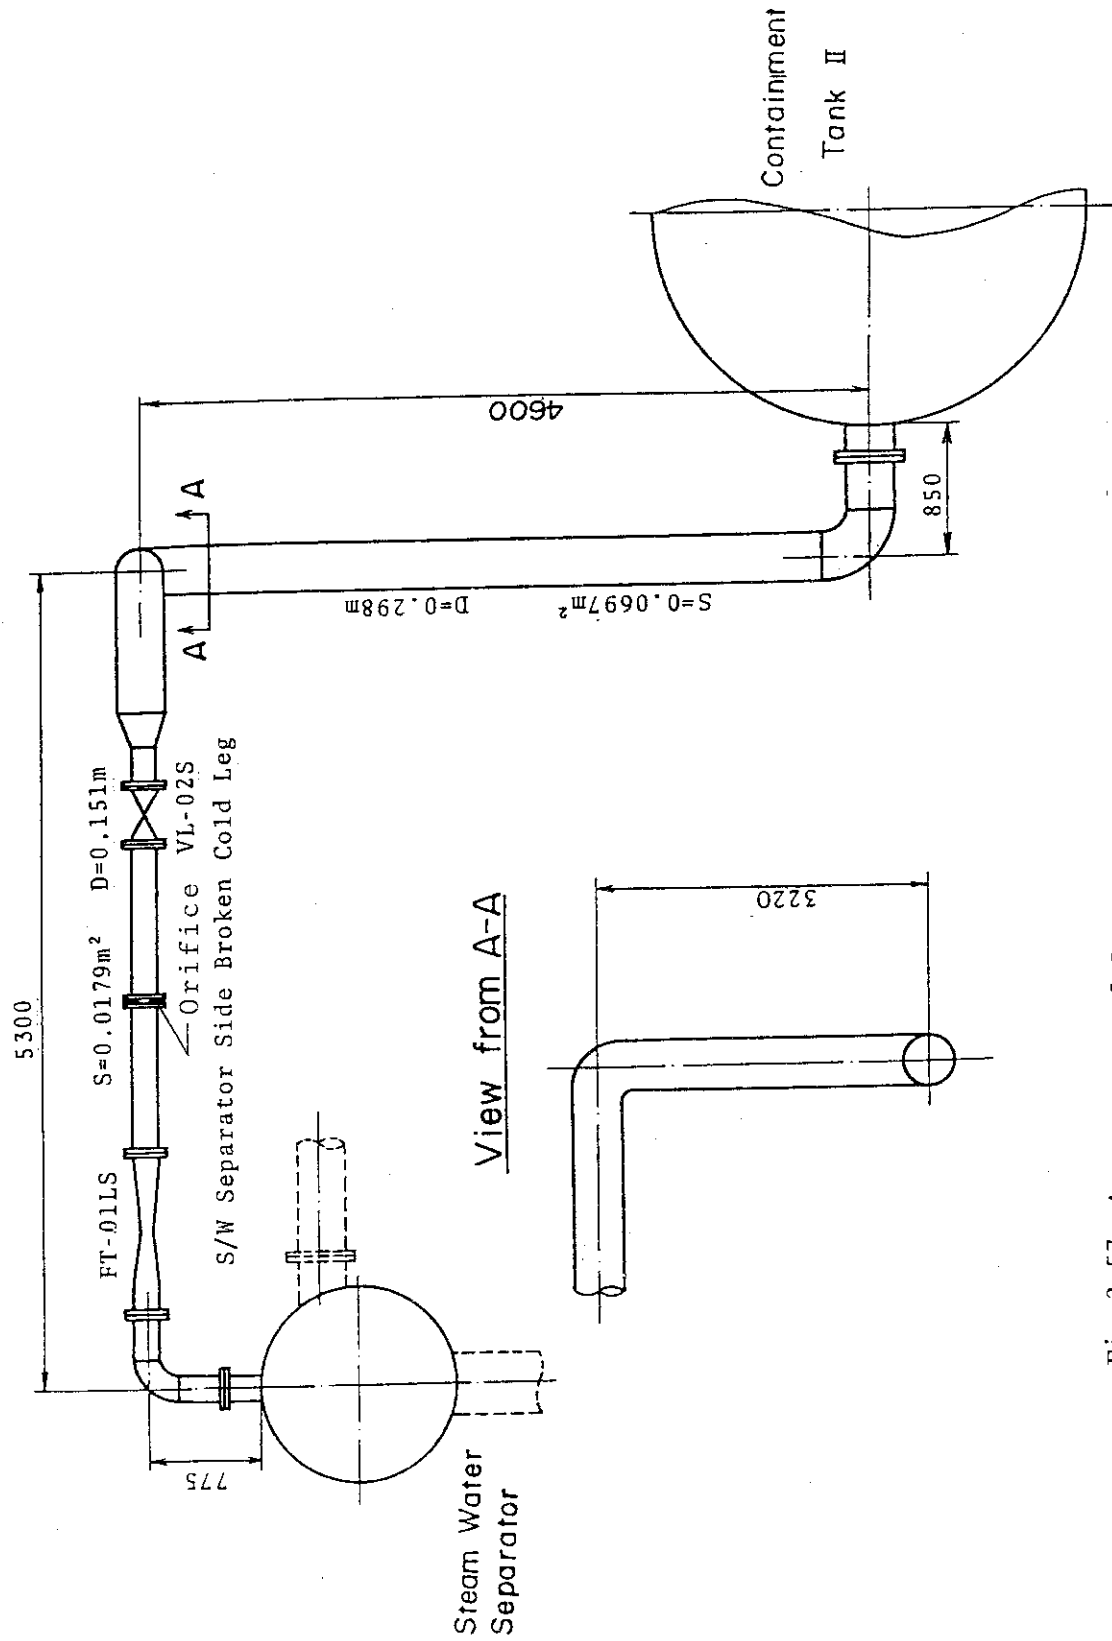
Arrangement of Steam-Water Separator Side Broken Cold Leg
